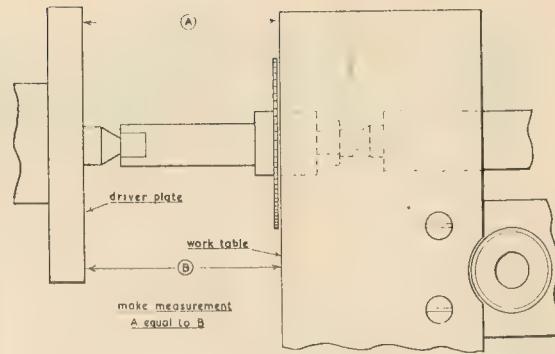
Showing the circular saw and the sawing table set up in the lathe
